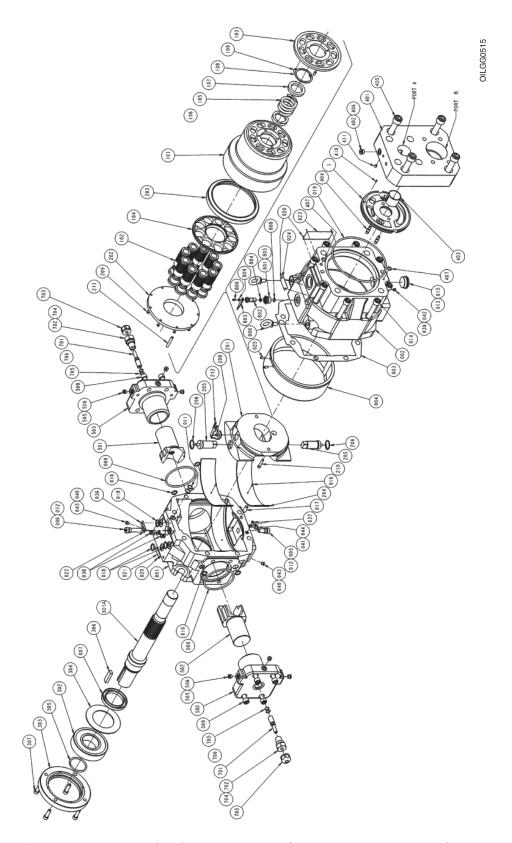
Exploded Parts Drawing for PVV-440 A2 w/Rear-Ported Valve Plate (518260 sheet 2)
